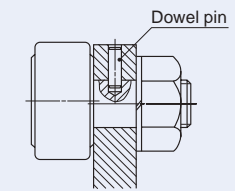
Mounting example of Solid Eccentric Stud Type Cam Follower
